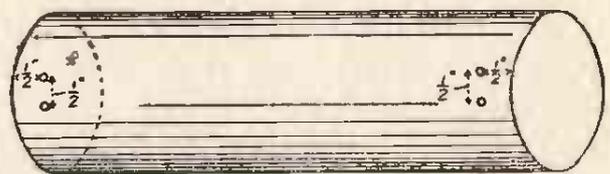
Holes bored at each end of cardboard tube, for fastening the ends of the wire.
